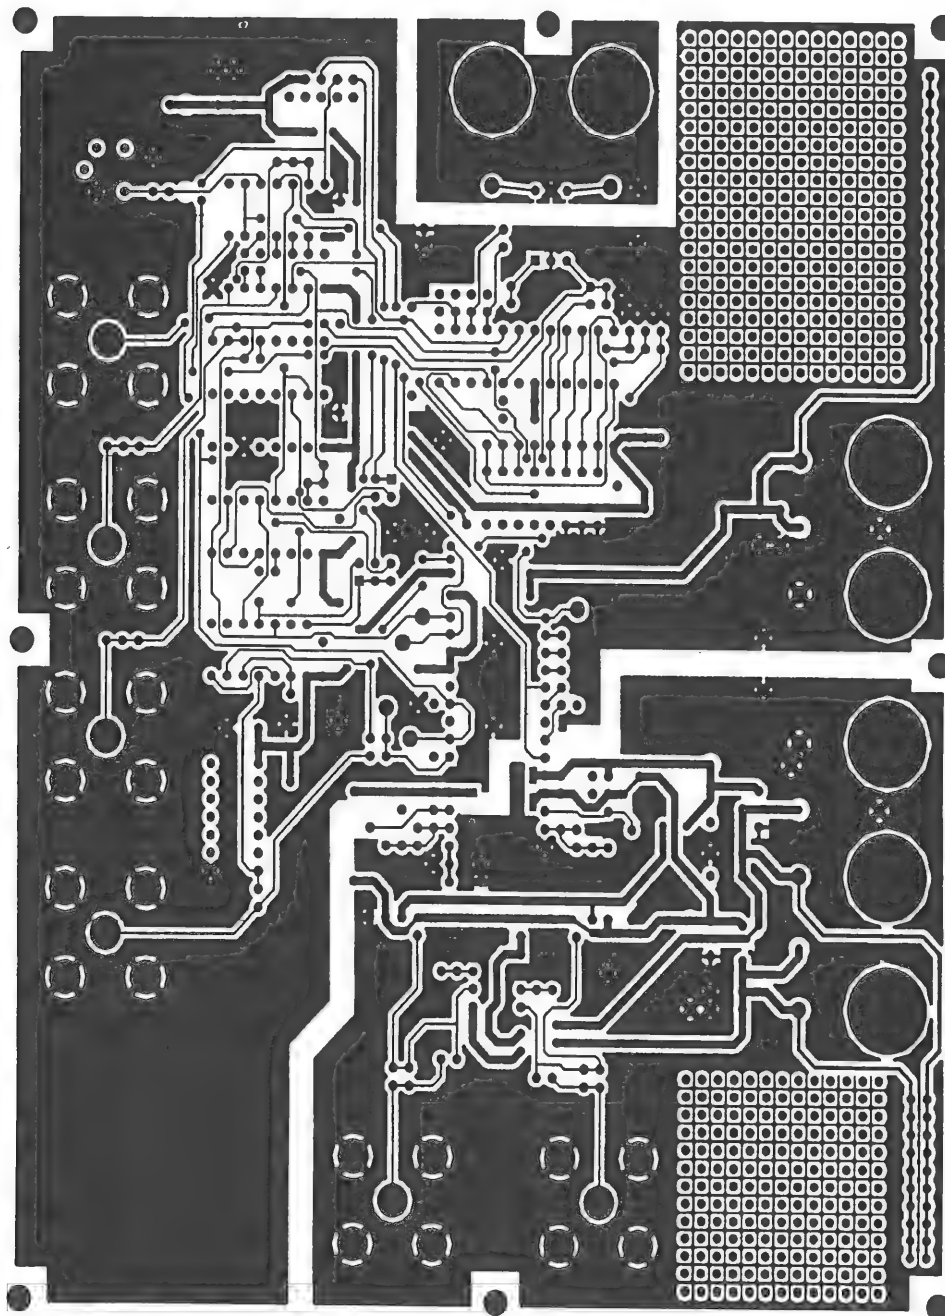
CDB5326/7/8/9 Rev. E. Solder Side
